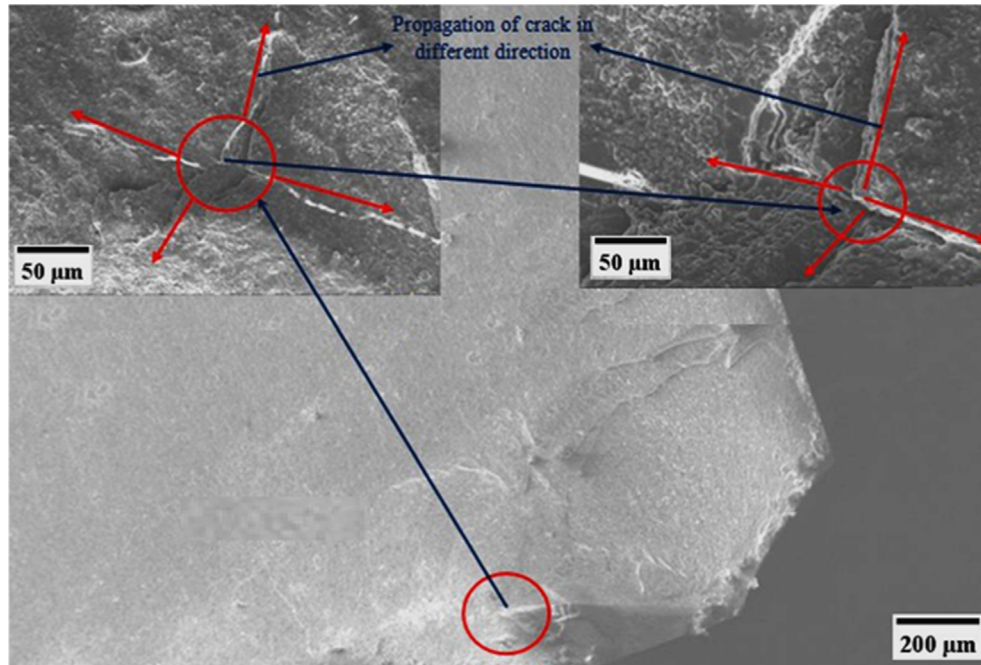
Failure of cutting inserts due to high stress developed during a long time of machining.
